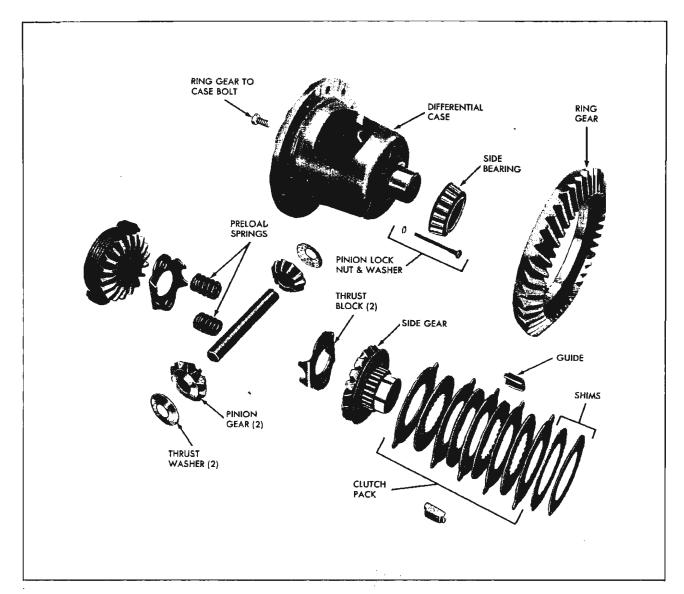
Exploded View - Safe-T-Track (2nd Type)
